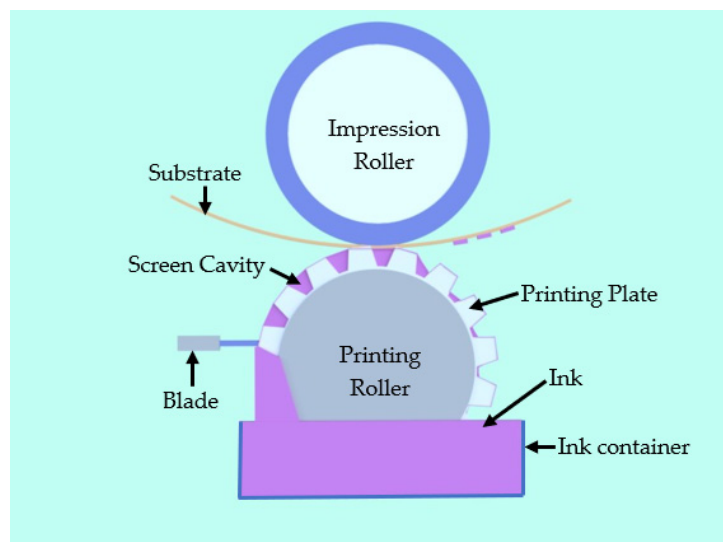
Schematic illustration of the main parts of a gravure printing machine.
